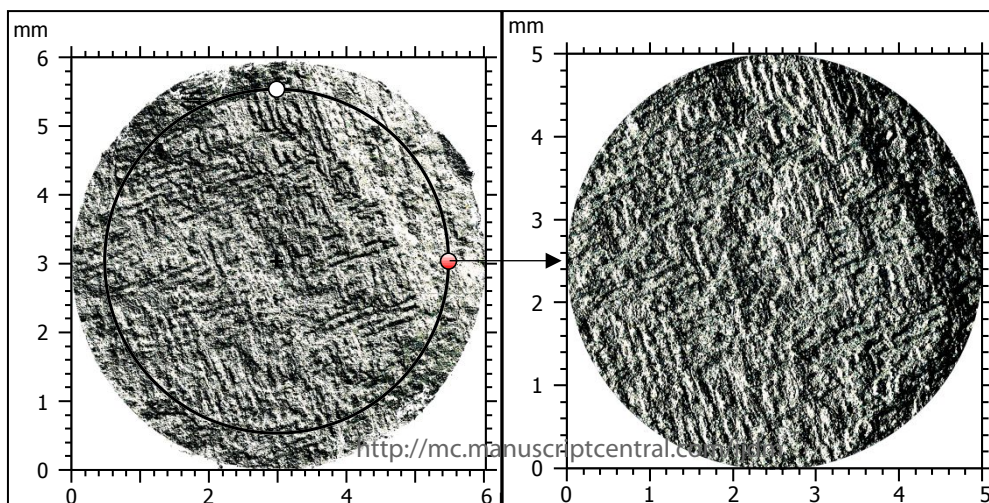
Original and extracted fracture surface areas, fracture surface generated at $\Delta\varepsilon/2 = 0.30\%$.
